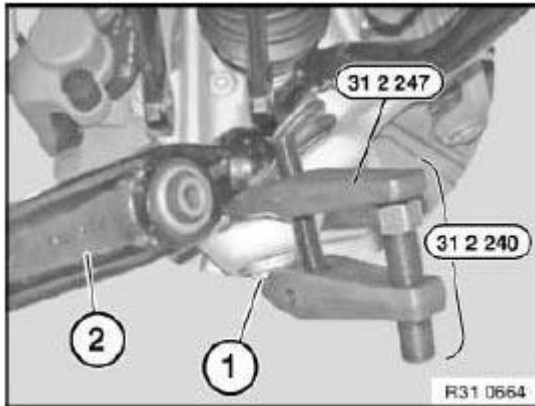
Identifying Control Arm, Nut And Special Tool (31 2 247)
